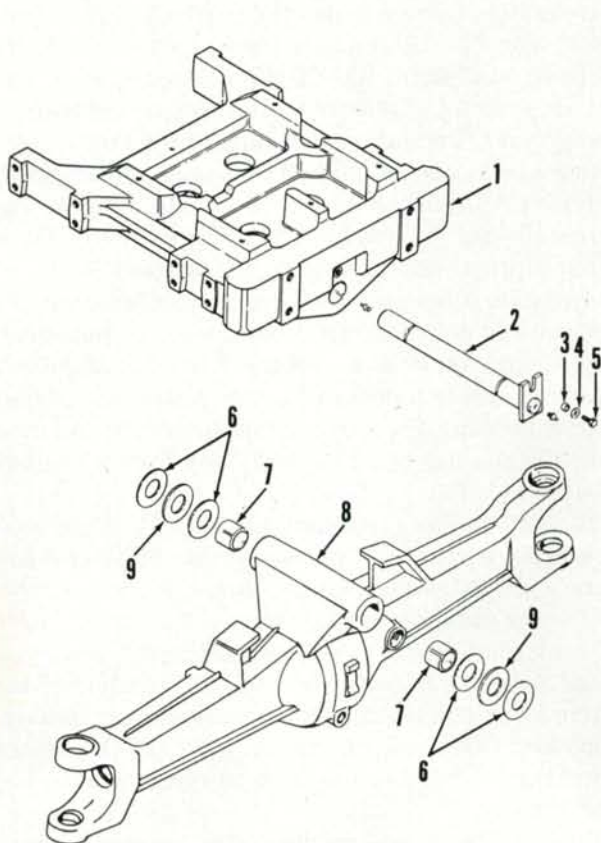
Front support and axle housing used on models equipped with front drive axle.
